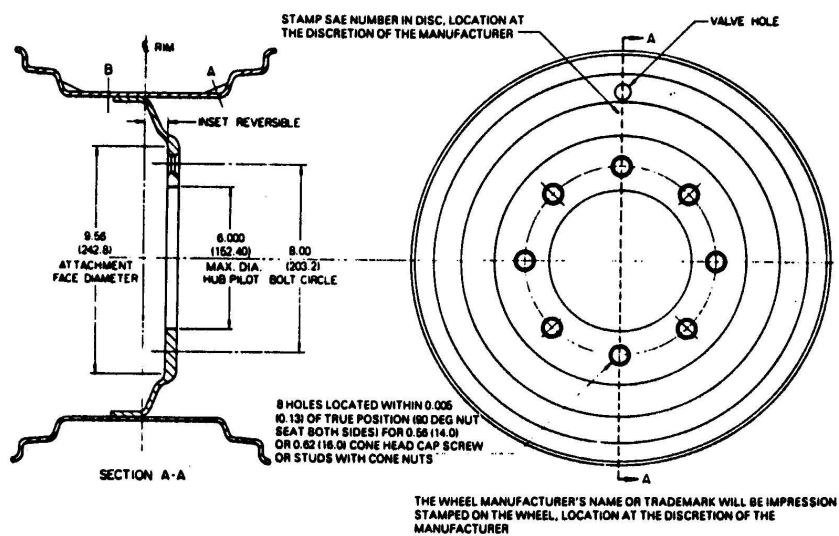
BOLT, 8 IN. BOLT CIRCLE GROUP
